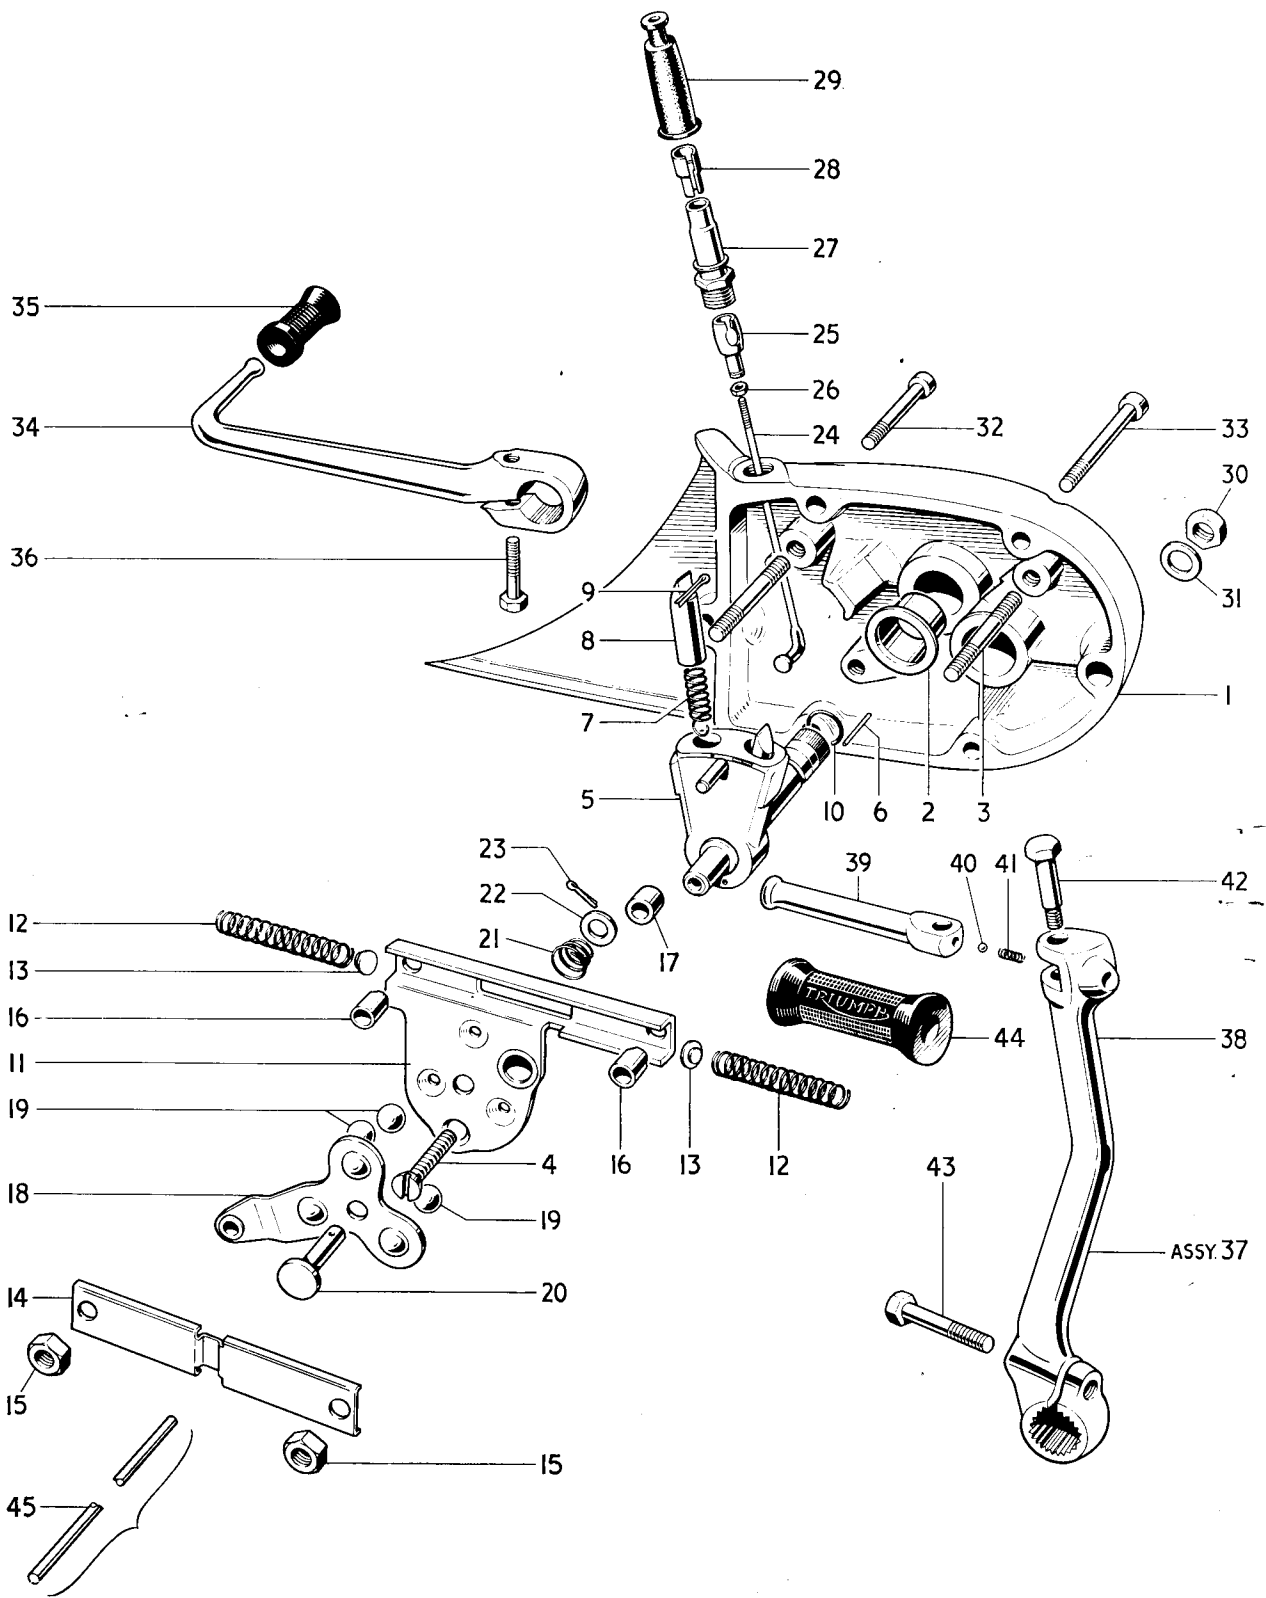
GEARBOX OUTER COVER AND LEVERS
